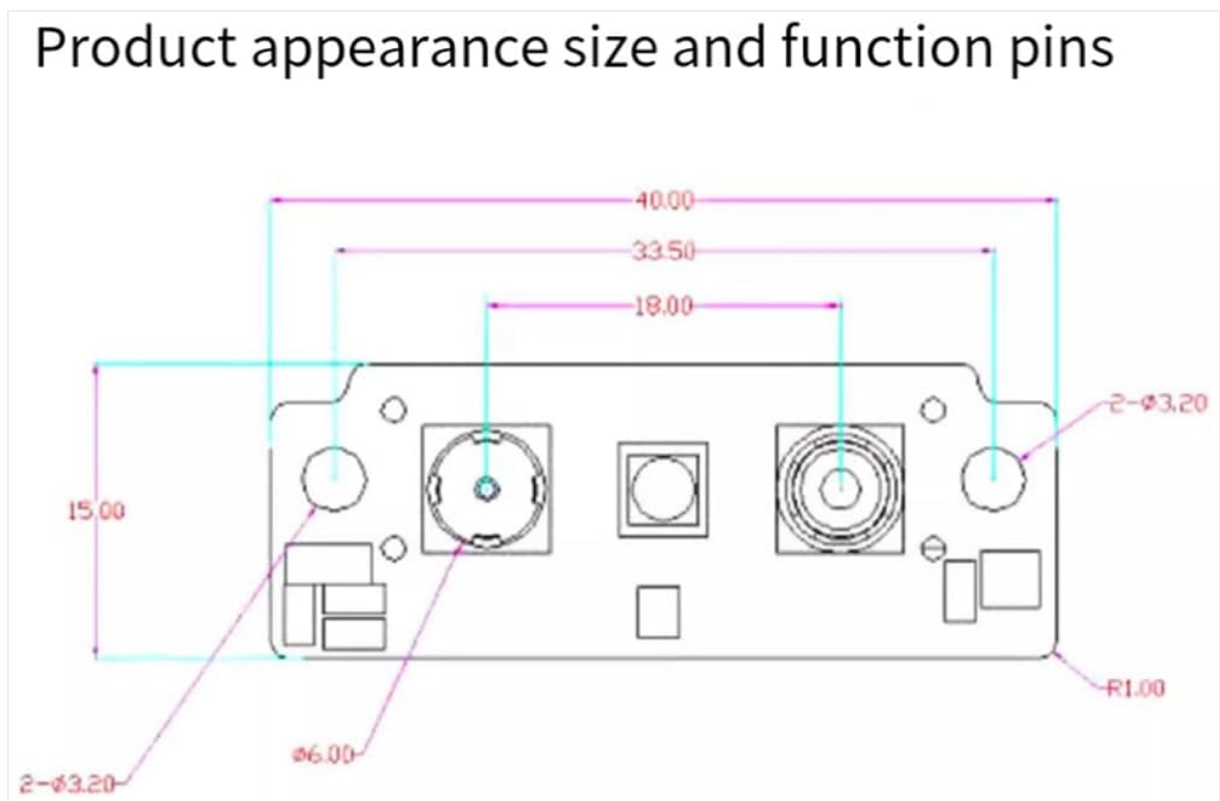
Technical drawing showing the physical dimensions and layout of the FM225 module, including measurements in millimeters.
